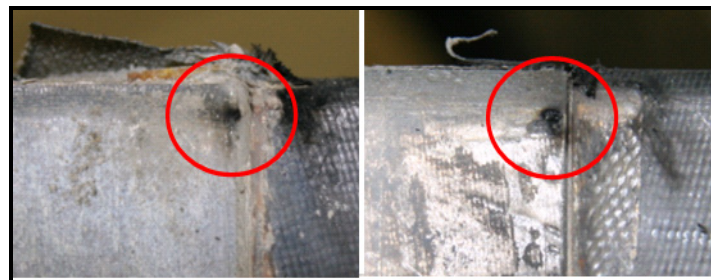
Failures sites of one slot PD site of bar 3B (left) and one site of bar 3A (right)
